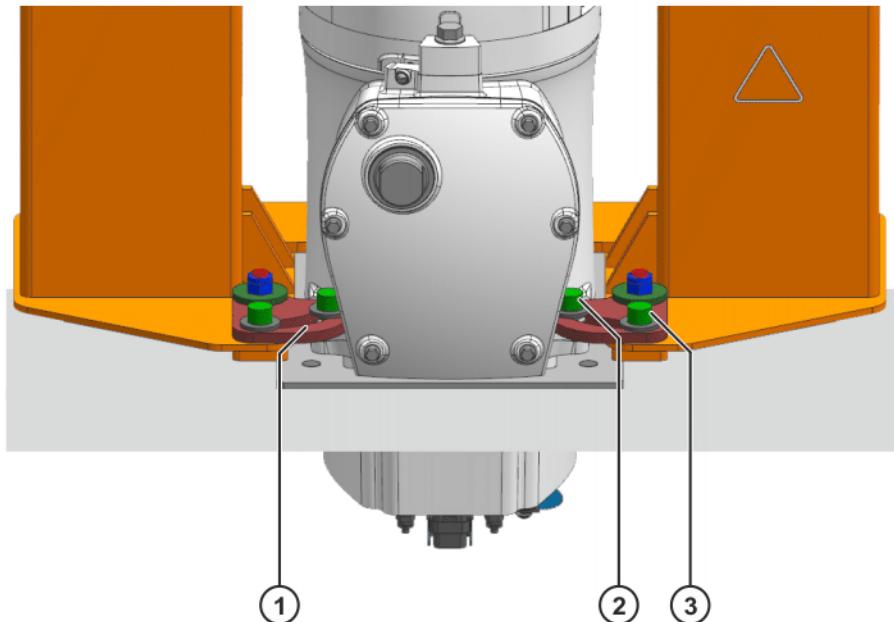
Pushing on the Load Lifting Attachment and fastening it at the front
